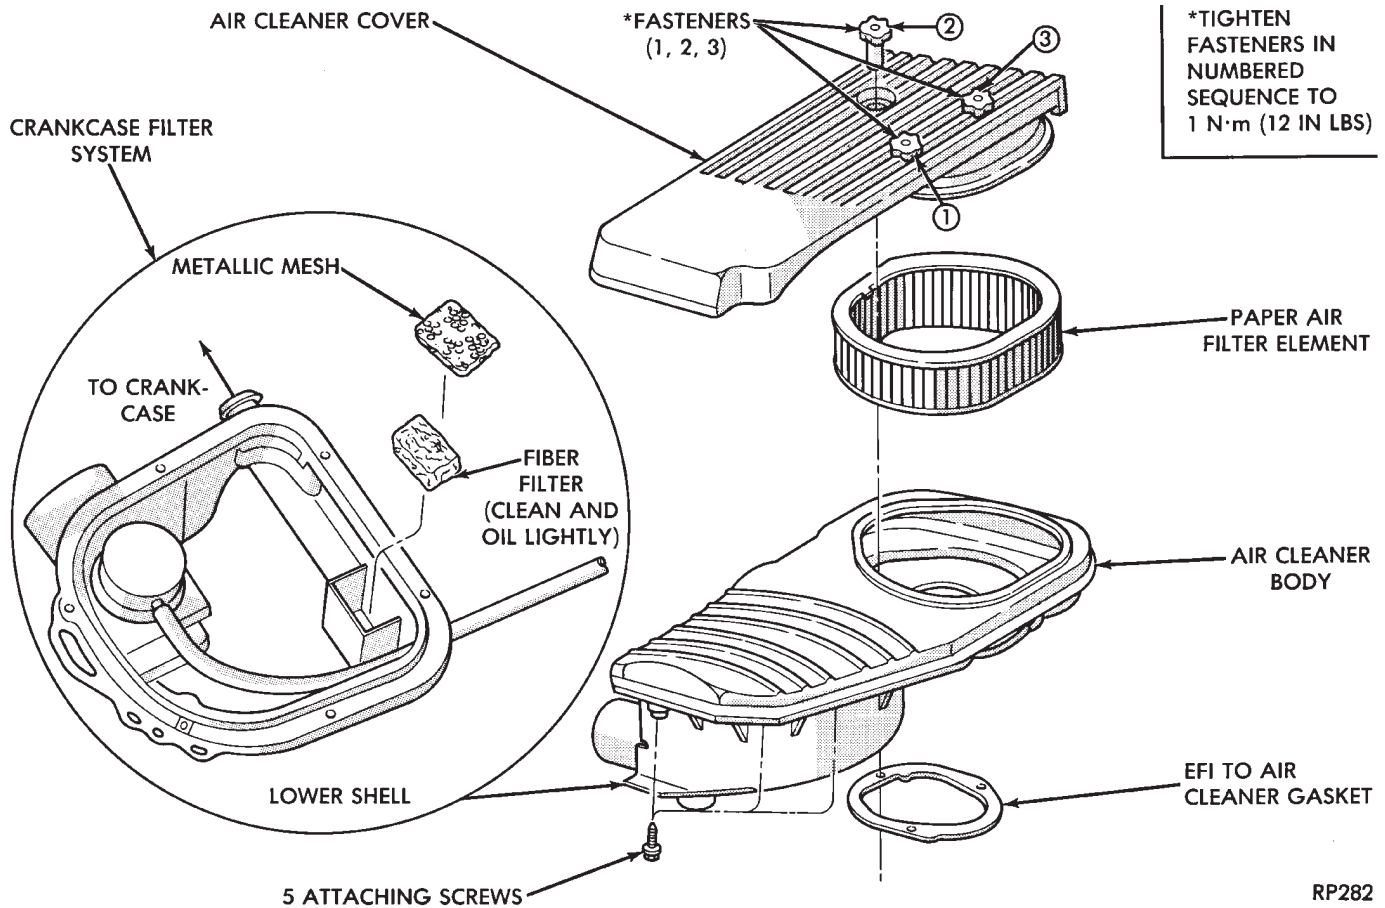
Air Cleaner Assembly—2.2L or 2.5L EFI Engine
